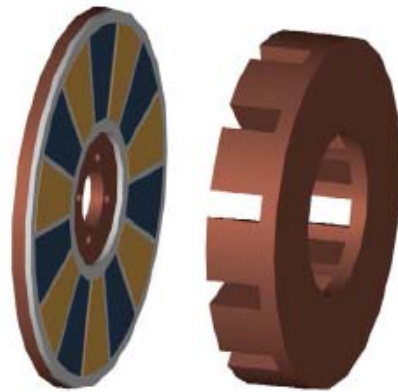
Single-sided axial flux machine with one PM rotor disk and slotted stator [77].
